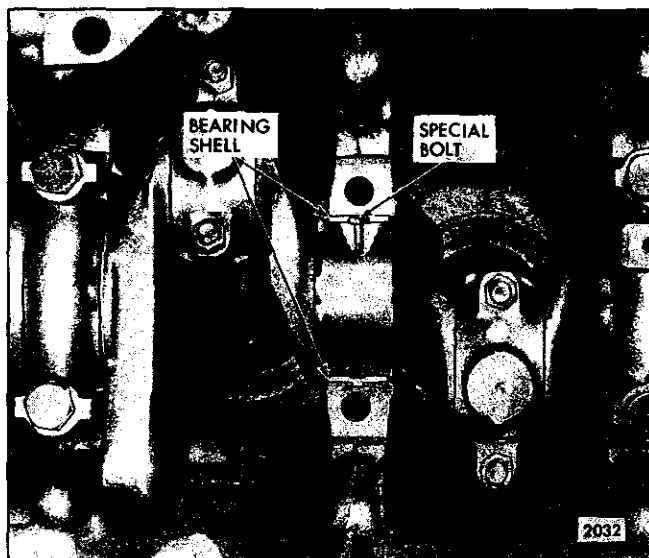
Removing Upper Main Bearing Shell (Except Rear Main)
